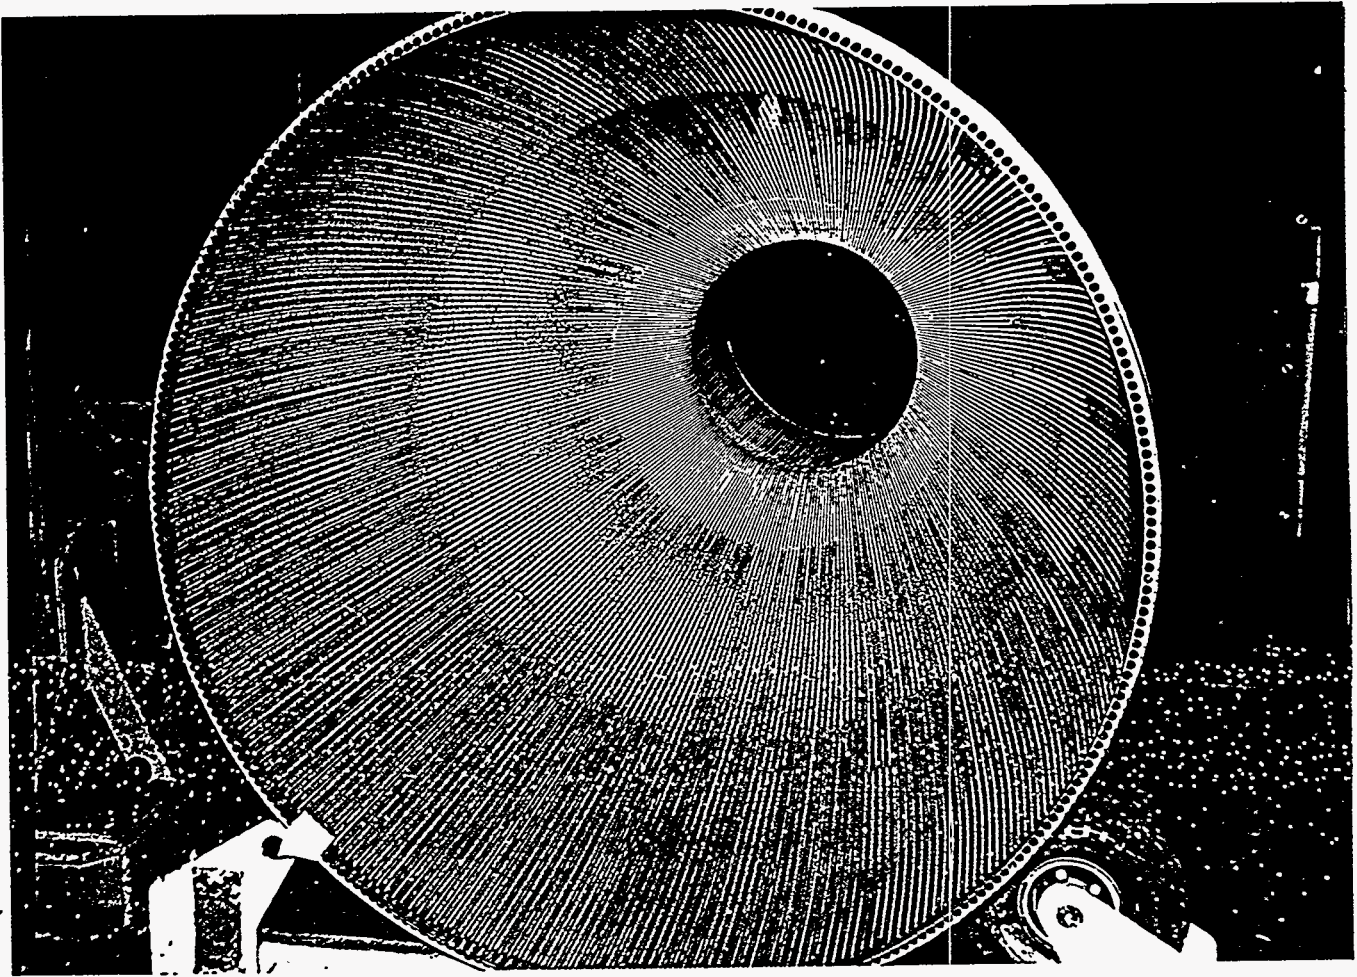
Thrust chamber component of a rocket engine during manufacturing
